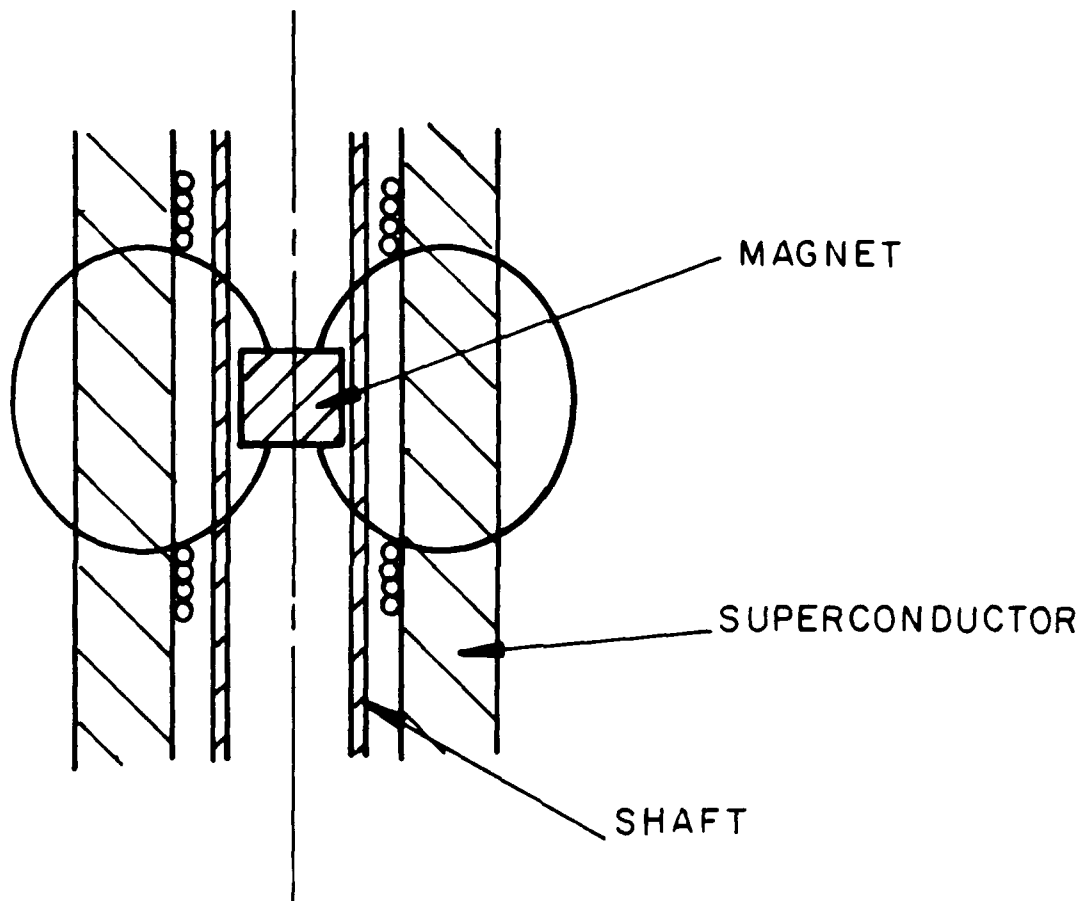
ARRANGEMENT OF DAMPING COILS FOR BEARING
